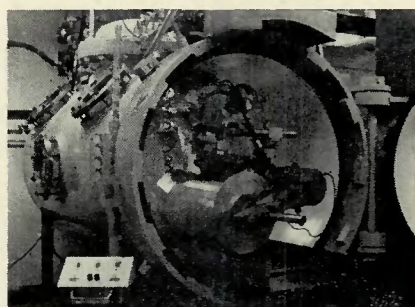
Welding chamber and fixture used for PIGMA welding study
